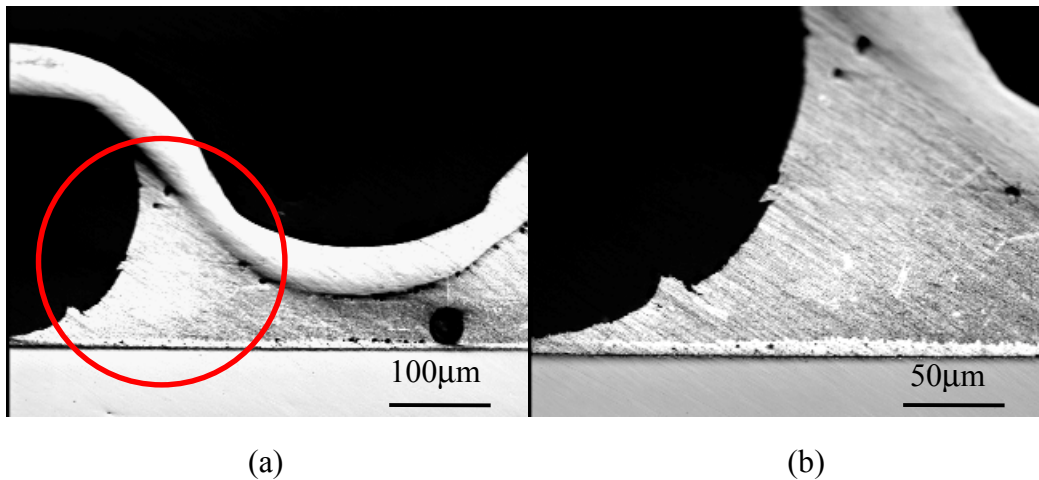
(a) A dimple solder joint after 400 thermal cycles; and (b) the zoomed-in view of the circled region.
